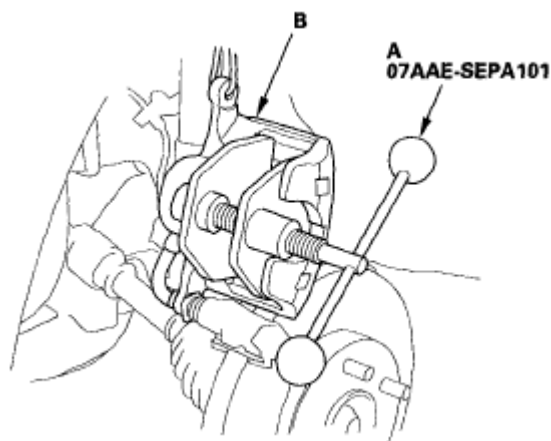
Mounting Brake Caliper Piston Compressor On Caliper Body
